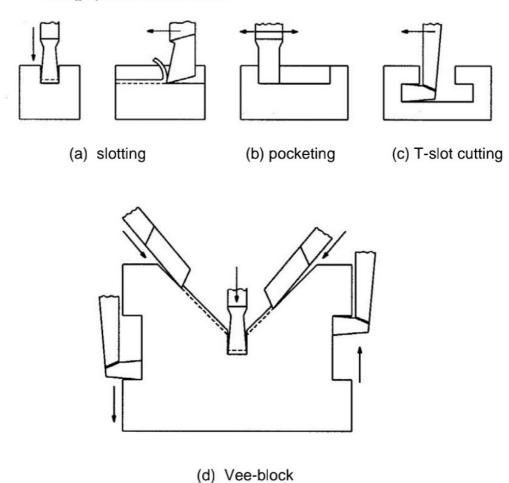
Machining (a) slot, (b) pocket (c) T-slot and (d) Vee block in shaping machine
